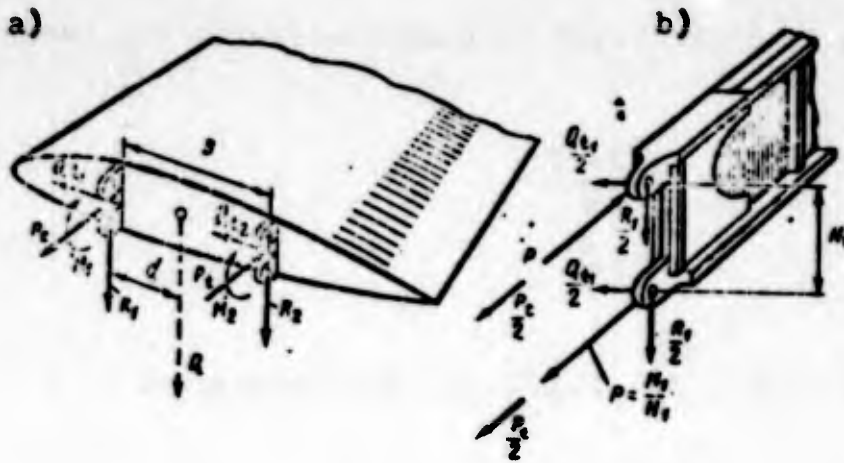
Towards rating a point attachment: a) forces in the moment assemblies of a point attachment of a detachable wing section; b) distribution of forces between the sockets of an assembly.
